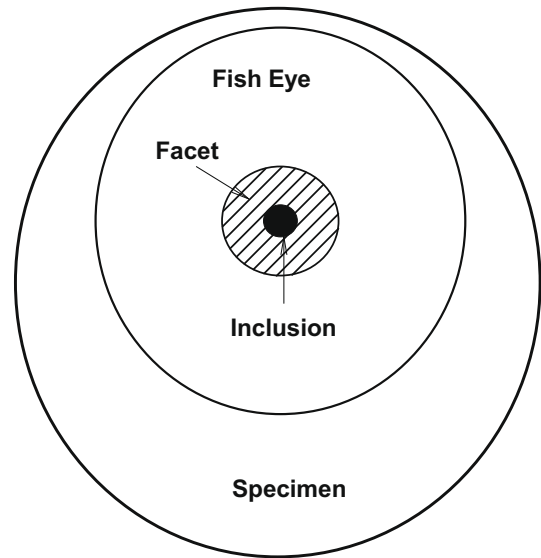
Schematic depiction of fracture surface with fish-eye [79].
